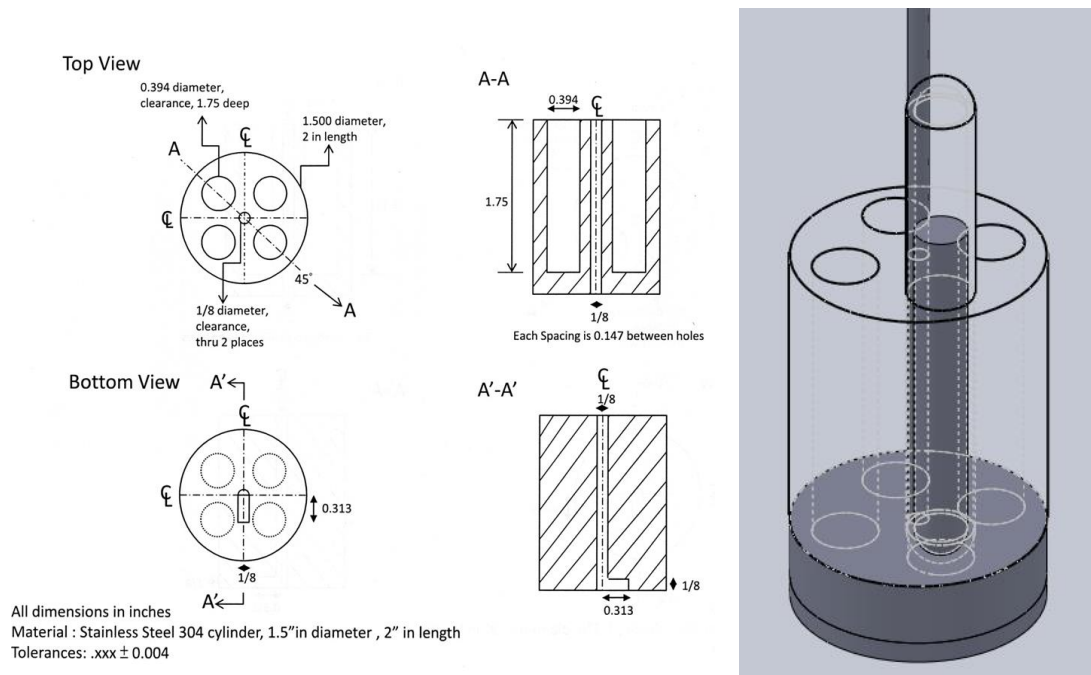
The engineering sketches (left) and 3D model (right) of capsules holder.
